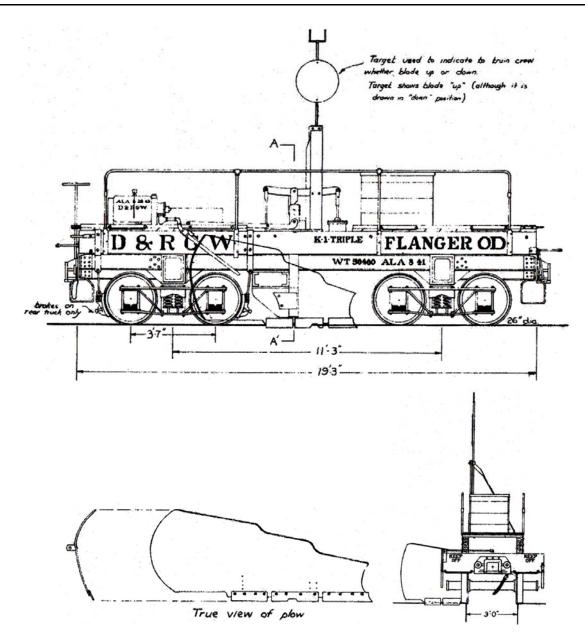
Drawings of the side and front views and the blade of Flanger OD after D&RGW rebuilt it in 1941 with steel frame and D&RGW arch bar trucks. Note that only one blade is shown in the top and front views. Flanger OT differed from Flanger OD in the blade and box shapes and in having a metal snow shield for the linkage in the center (Sloan, p. 291).
